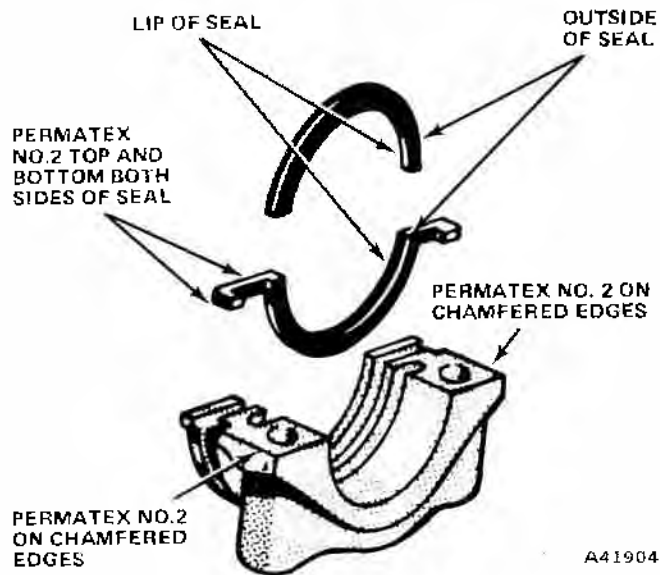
A-35 Rear Main Oil Seal and Cap Installation
